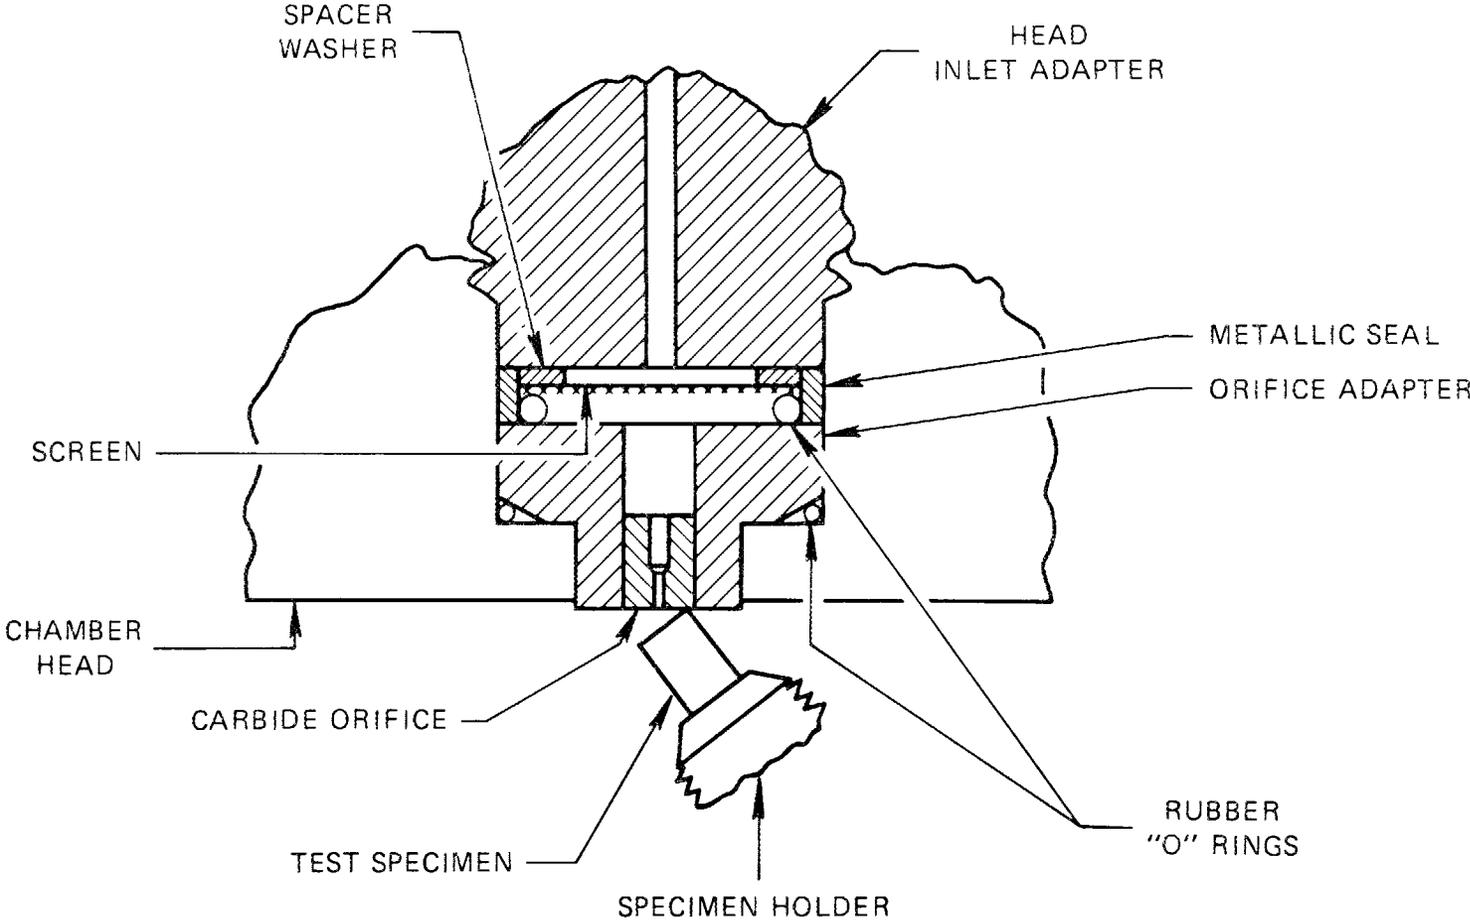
Schematic of the specimen fixturing for the slurry erosion test.
